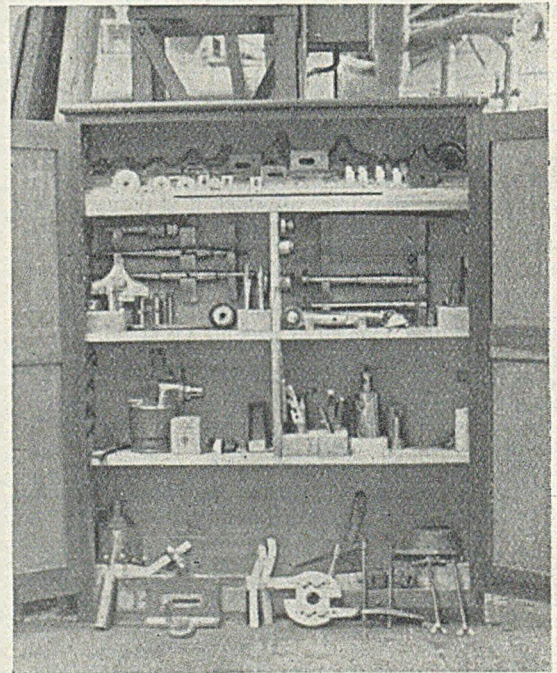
WADKIN TOOL-EQUIPMENT CUPBOARD.
